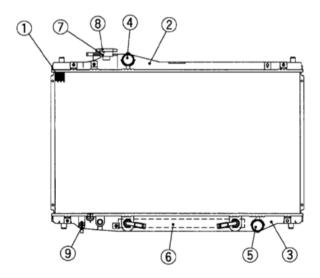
The main components of a radiator: 1) core 2) upper tank 3) lower tank 4) inlet pipe 5) outlet pipe 6) oil cooler for automatic heat transfer 7) filler neck 8) pressure cap 9) drain valve
